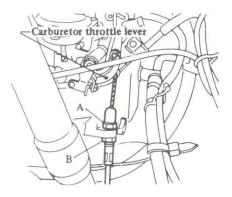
Kickdown (throttle) cable locknuts A and B at carburettor end (Sec 7)
